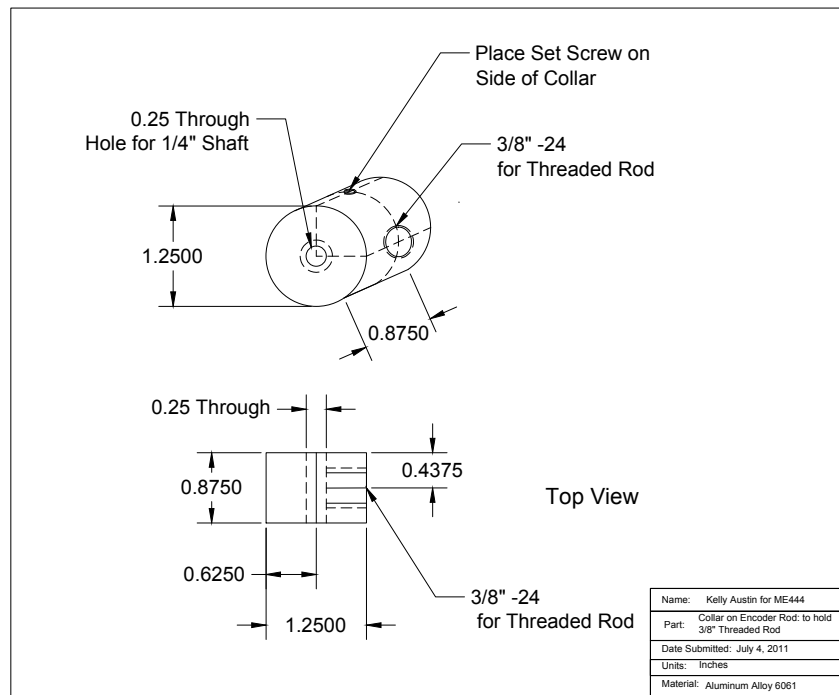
Aluminum collar attached over a 6.35mm diameter rod, providing a threaded attachment for the pendulum rod
